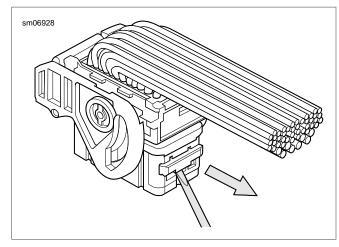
Molex CMC Sealed Connector Secondary Lock
